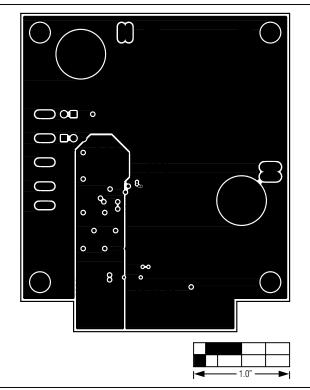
MAX15118 EV Kit PCB Layout—Inner Layer 2
